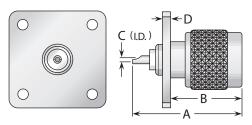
(Solder pot contact, 1" square flange, interchangeable with type N standard flange size)
